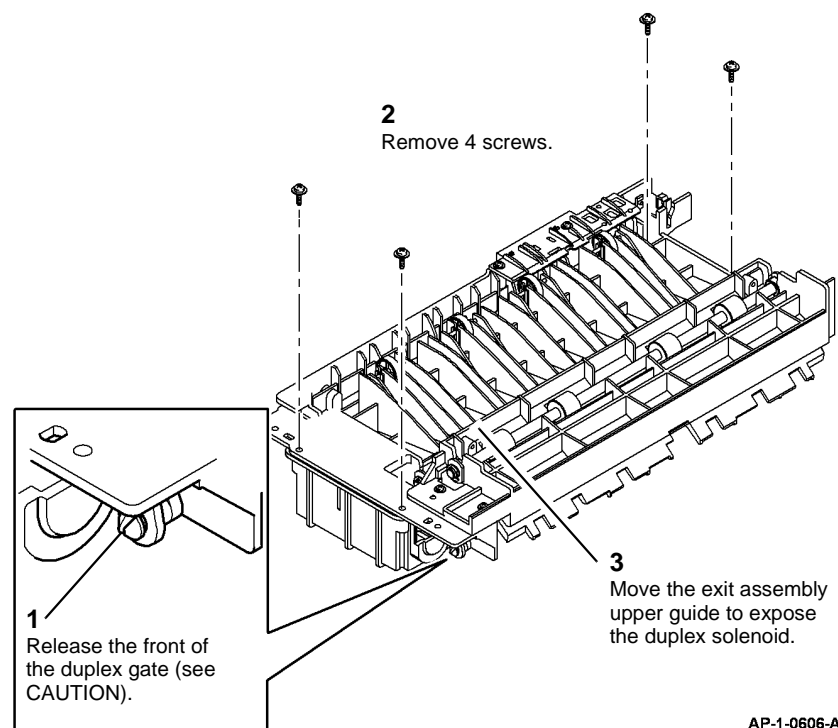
Removing the Duplex Gate and Exit Assembly Upper Guide
